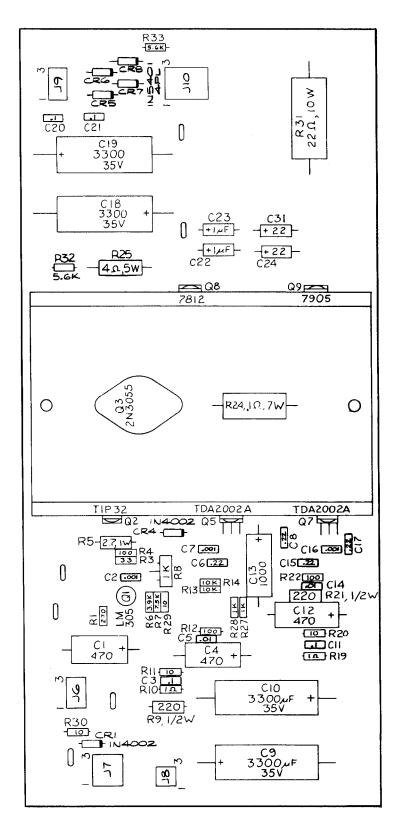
Regulator/Audio II PCB Assembly A035435-02 H
